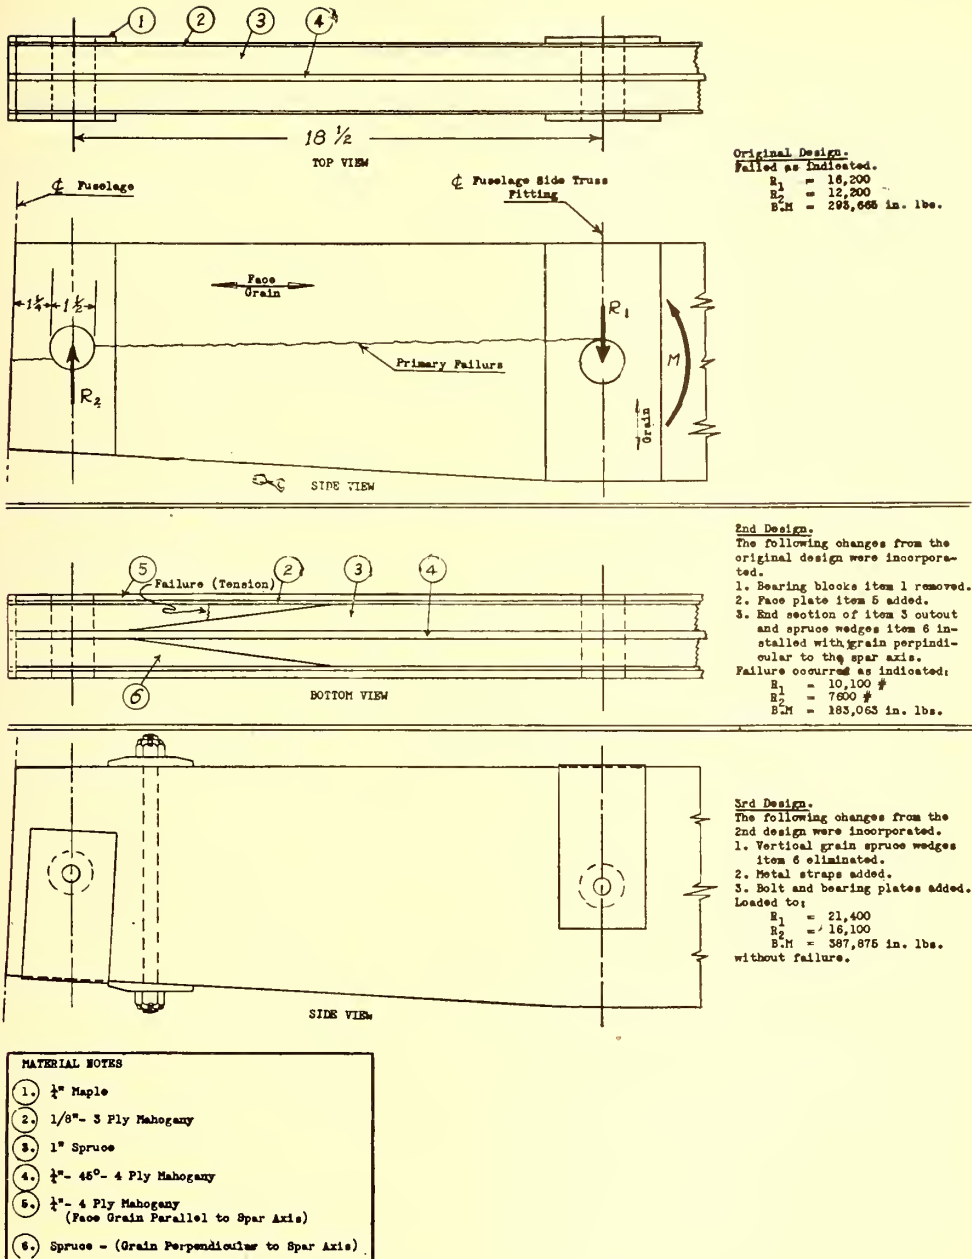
Cantilever Wood Spar at Fuselage Attachment.
